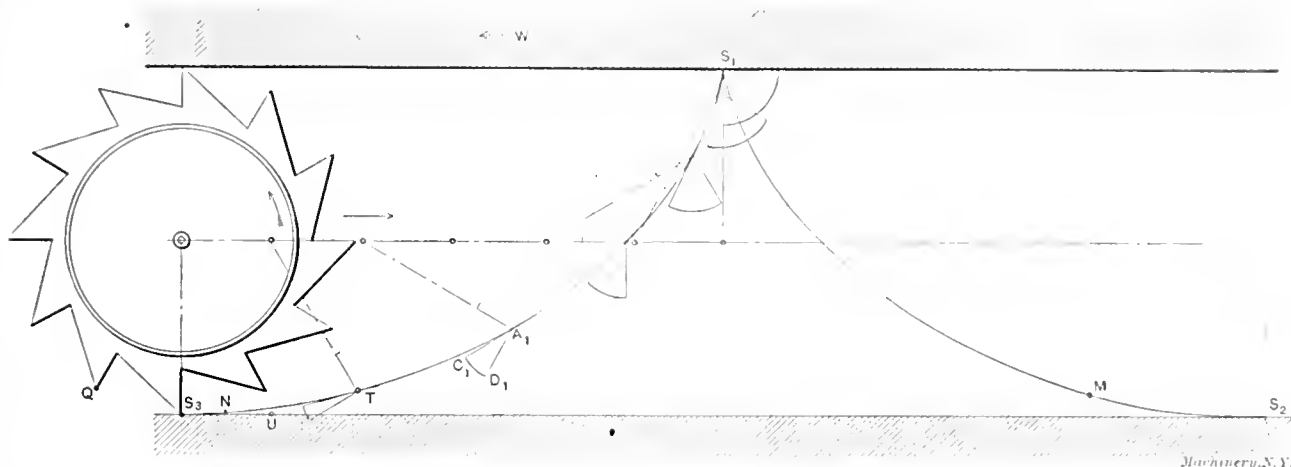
Path of Milling Cutter Tooth, with an Imaginary Feed equal to the Cutter Circumference.
